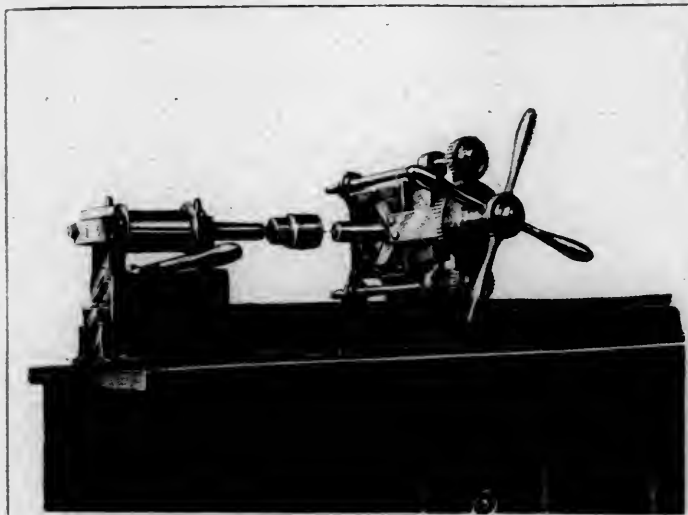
CENTERING MACHINE DESIGNED AND BUILT IN CENTRAL TOOL ROOM. THE COST OF THE MACHINE IS LOW; IT IS RAPID AND ACCURATE IN OPERATION.
